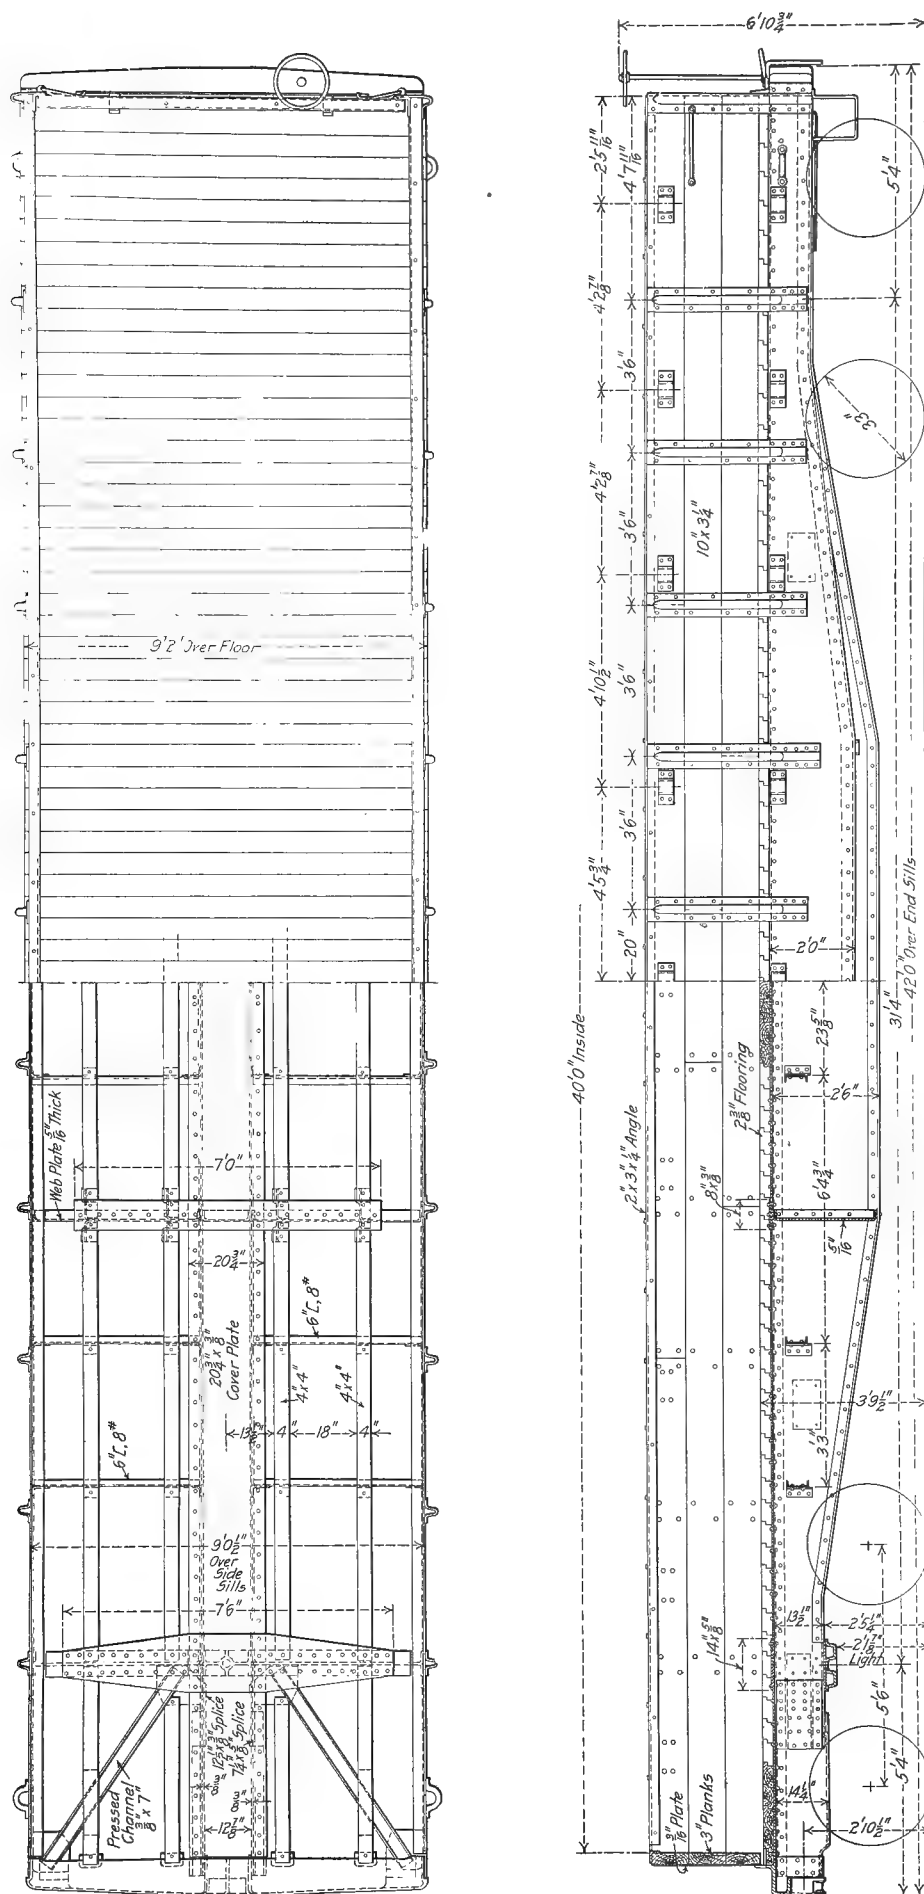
Central Railroad of New Jersey Steel Underframe 50-Ton Capacity Gondola Car. See Also Figs. 58 and 322. Builder, American Car & Foundry Co.
